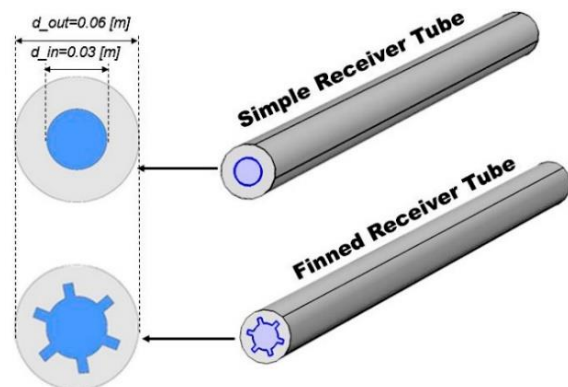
Schematic view of two different receiver tubes designs of Solar PTC.
